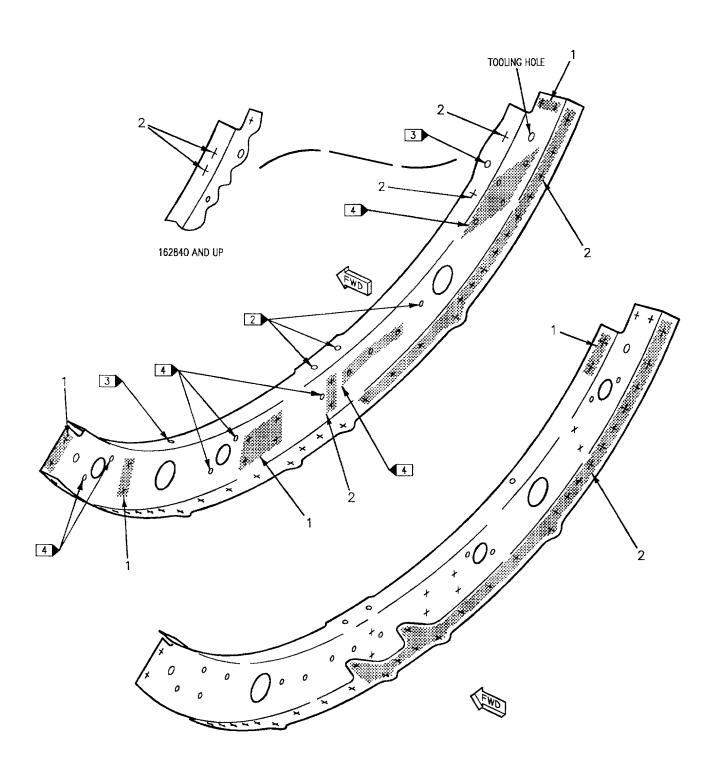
Former, 74A313186, Fastener Index (Sheet 1)
